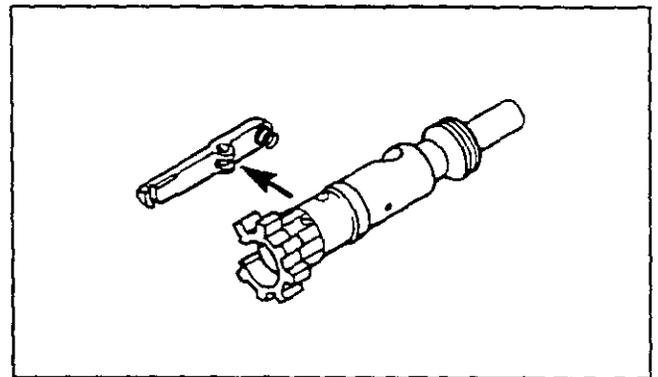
BOLT CARRIER DISASSEMBLY (CONT)
